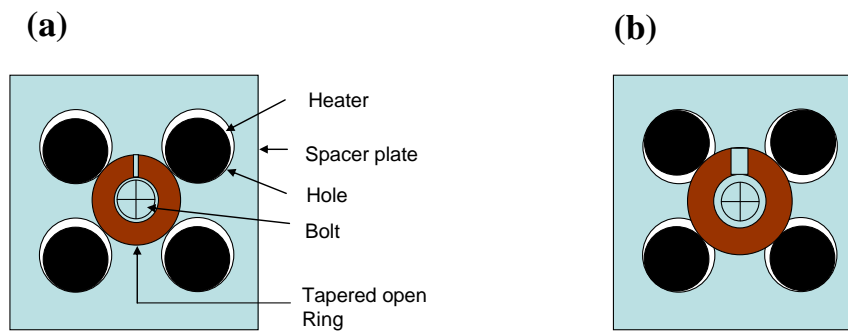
System for fastening heater rods to spacer plates (a) Schematic of a part of the spacer plate with four holes of 1.15 cm in diameter, heaters in contact with the bottom of the openings and a tapered open ring with a bolt (b) The bolt screwed to the spacer plate with the tapered opened ring pushing the heaters against the holes.
